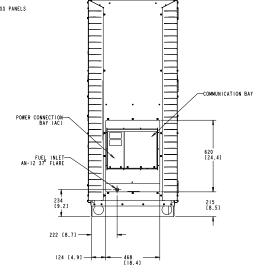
MODEL GTAA OUTLINE DRAWING-SHEET 1
